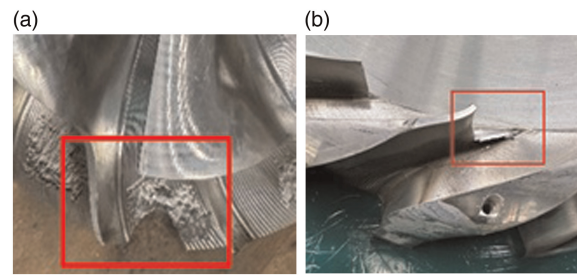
Disk fracture and radial diffuser damage. (a) disk fracture and (b) radial diffuser damage.
